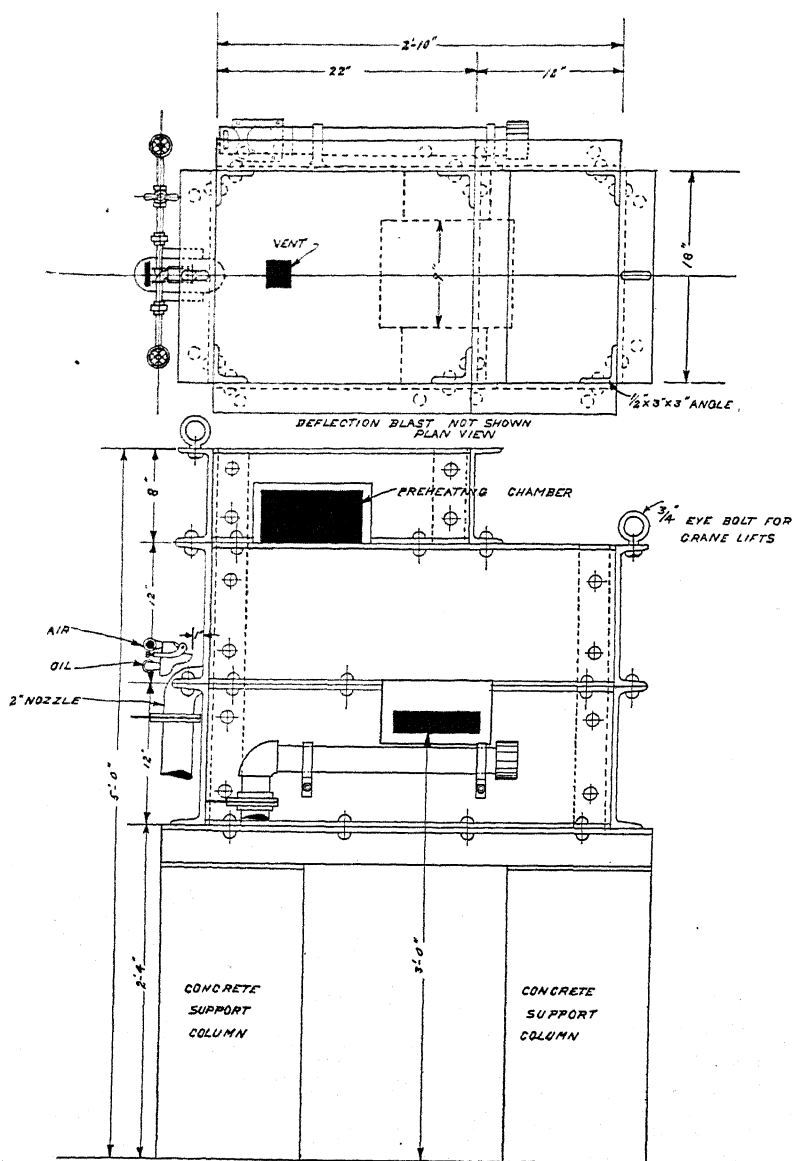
HIGH-SPEED TOOL-STEEL FURNACE.
